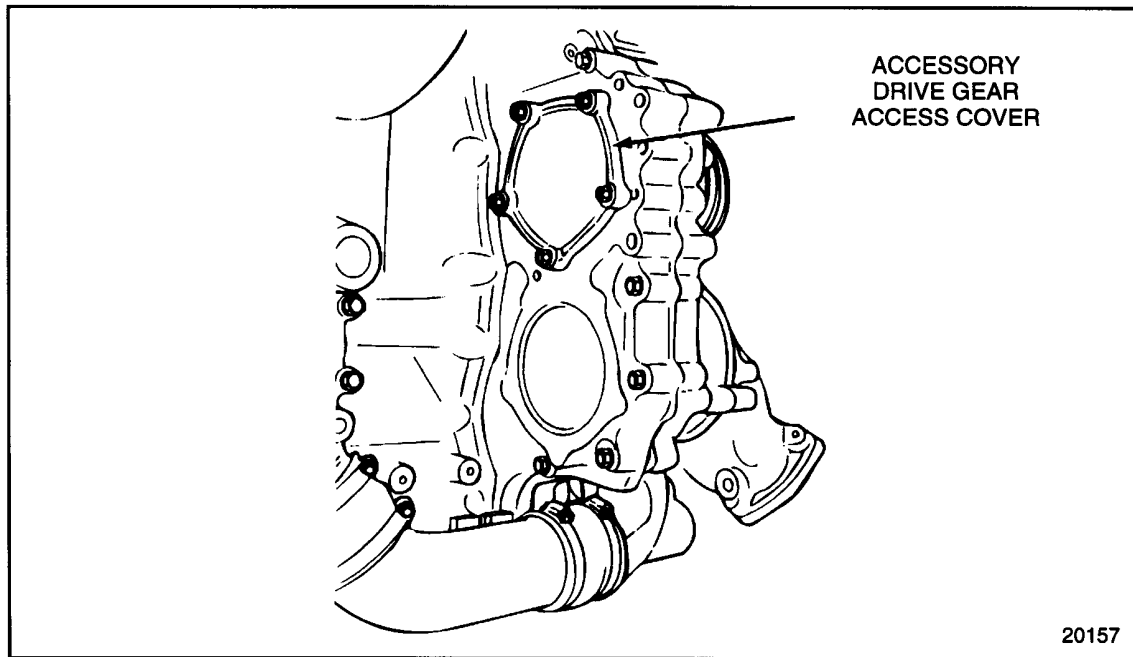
Accessory Drive Assembly Drive Gear Access Cover
